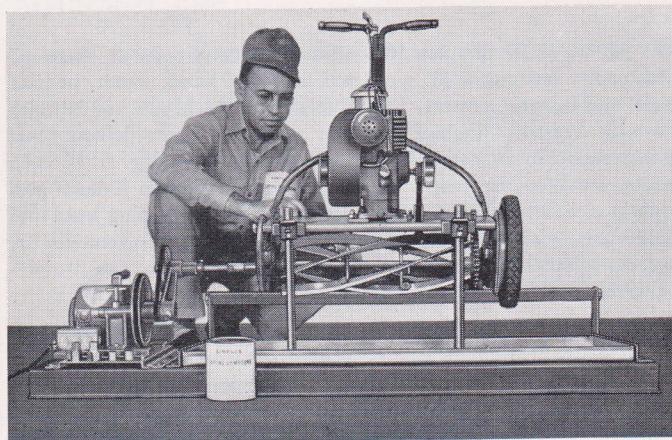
Front view of power mower in Simplex clearly showing method of support and how the drive shaft is coupled to the reel shaft.
